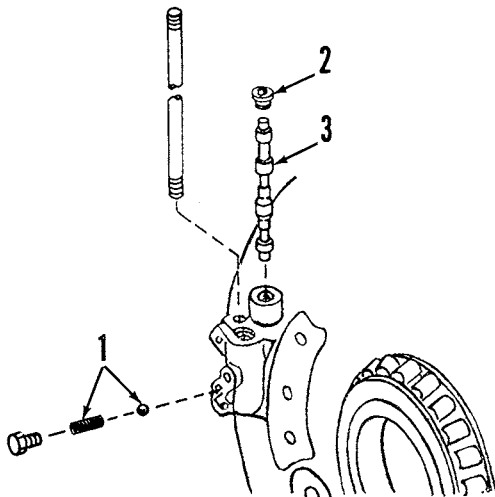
The Hi-Lo shift valve is located on the front of brake piston housing. Remove plug (2) to withdraw detent ball and spring (1). Remove plug (2) to withdraw valve spool (3).
